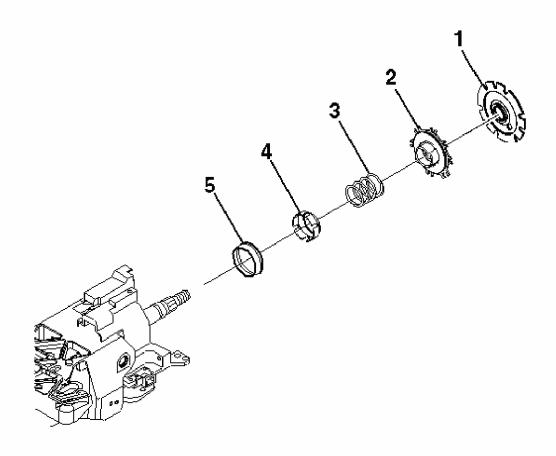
View of Shaft Lock Shield Assembly, Turn Signal Cancel Cam Assembly, Upper Bearing Spring, Bearing Inner Race Seat & Inner Race Courtesy of GENERAL MOTORS CORP.
